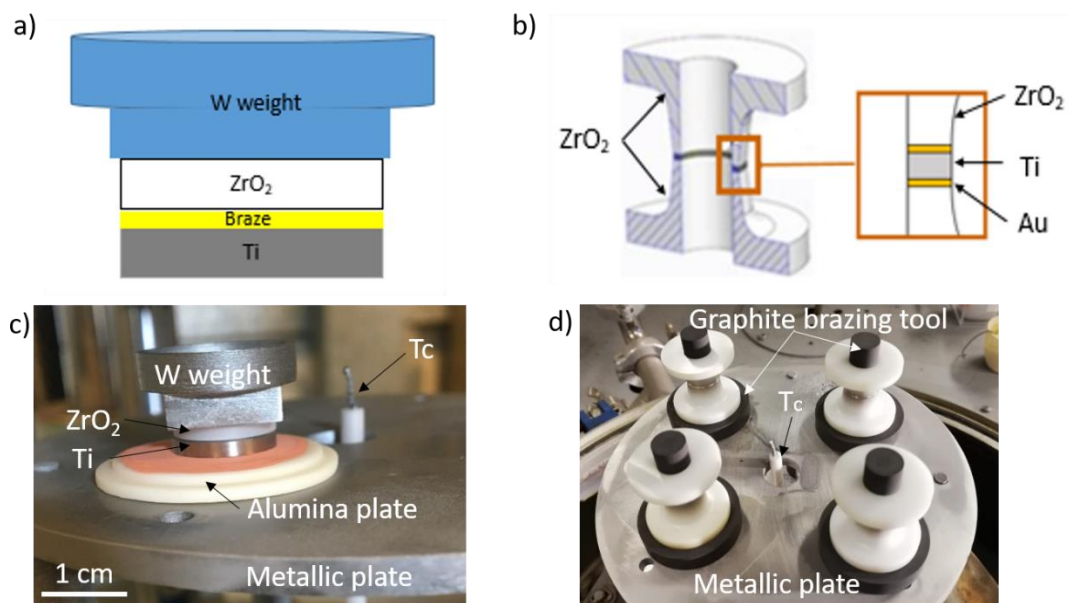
Schematic representation of a) a basic sandwich brazed sample, b) a cross section of a brazed tensile specimen, and pictures of c) a sandwich brazed sample in the furnace and d) four tensile specimens simultaneously brazed in the LPA furnace.
